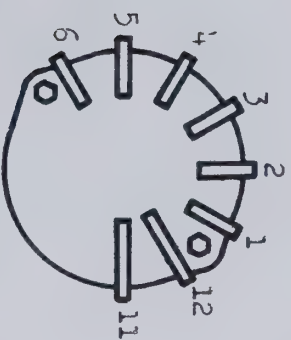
D. SW6, COUPLING SWITCH, REAR VIEW. BOTTOM SIDE OF CHASSIS UP
